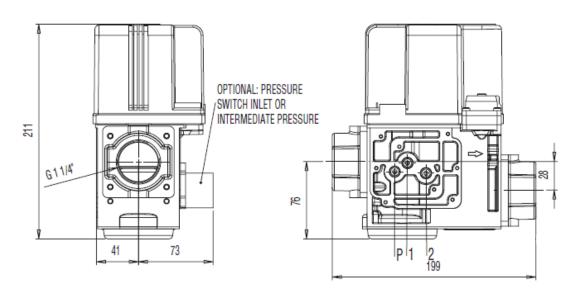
Dimensional drawing VR434/VR834 series (DN32)
